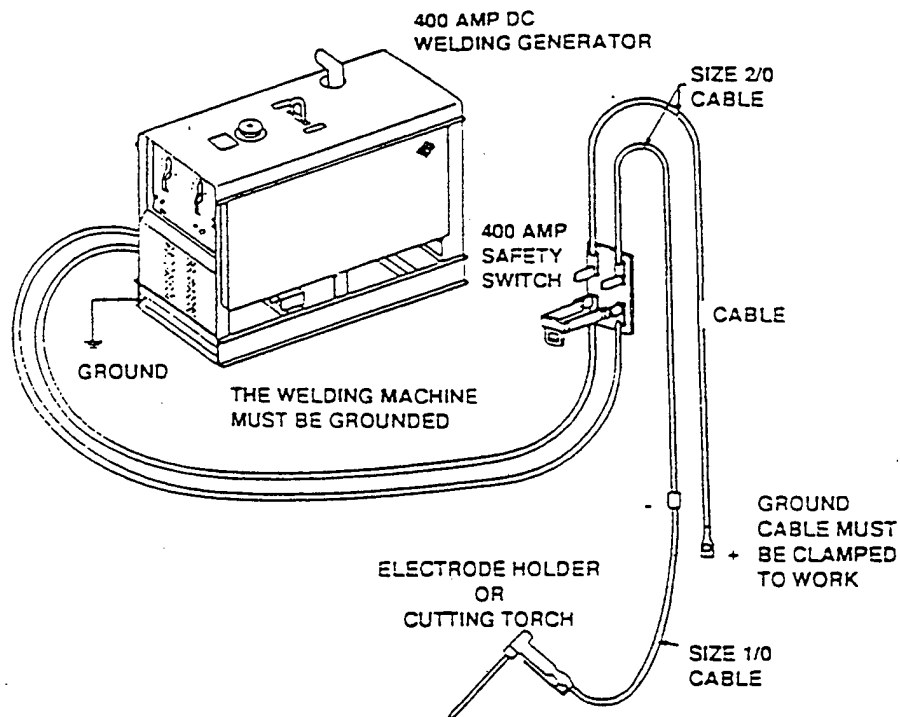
Welding and safety equipment configuration for Underwater welding and cutting [Ref. 5]
